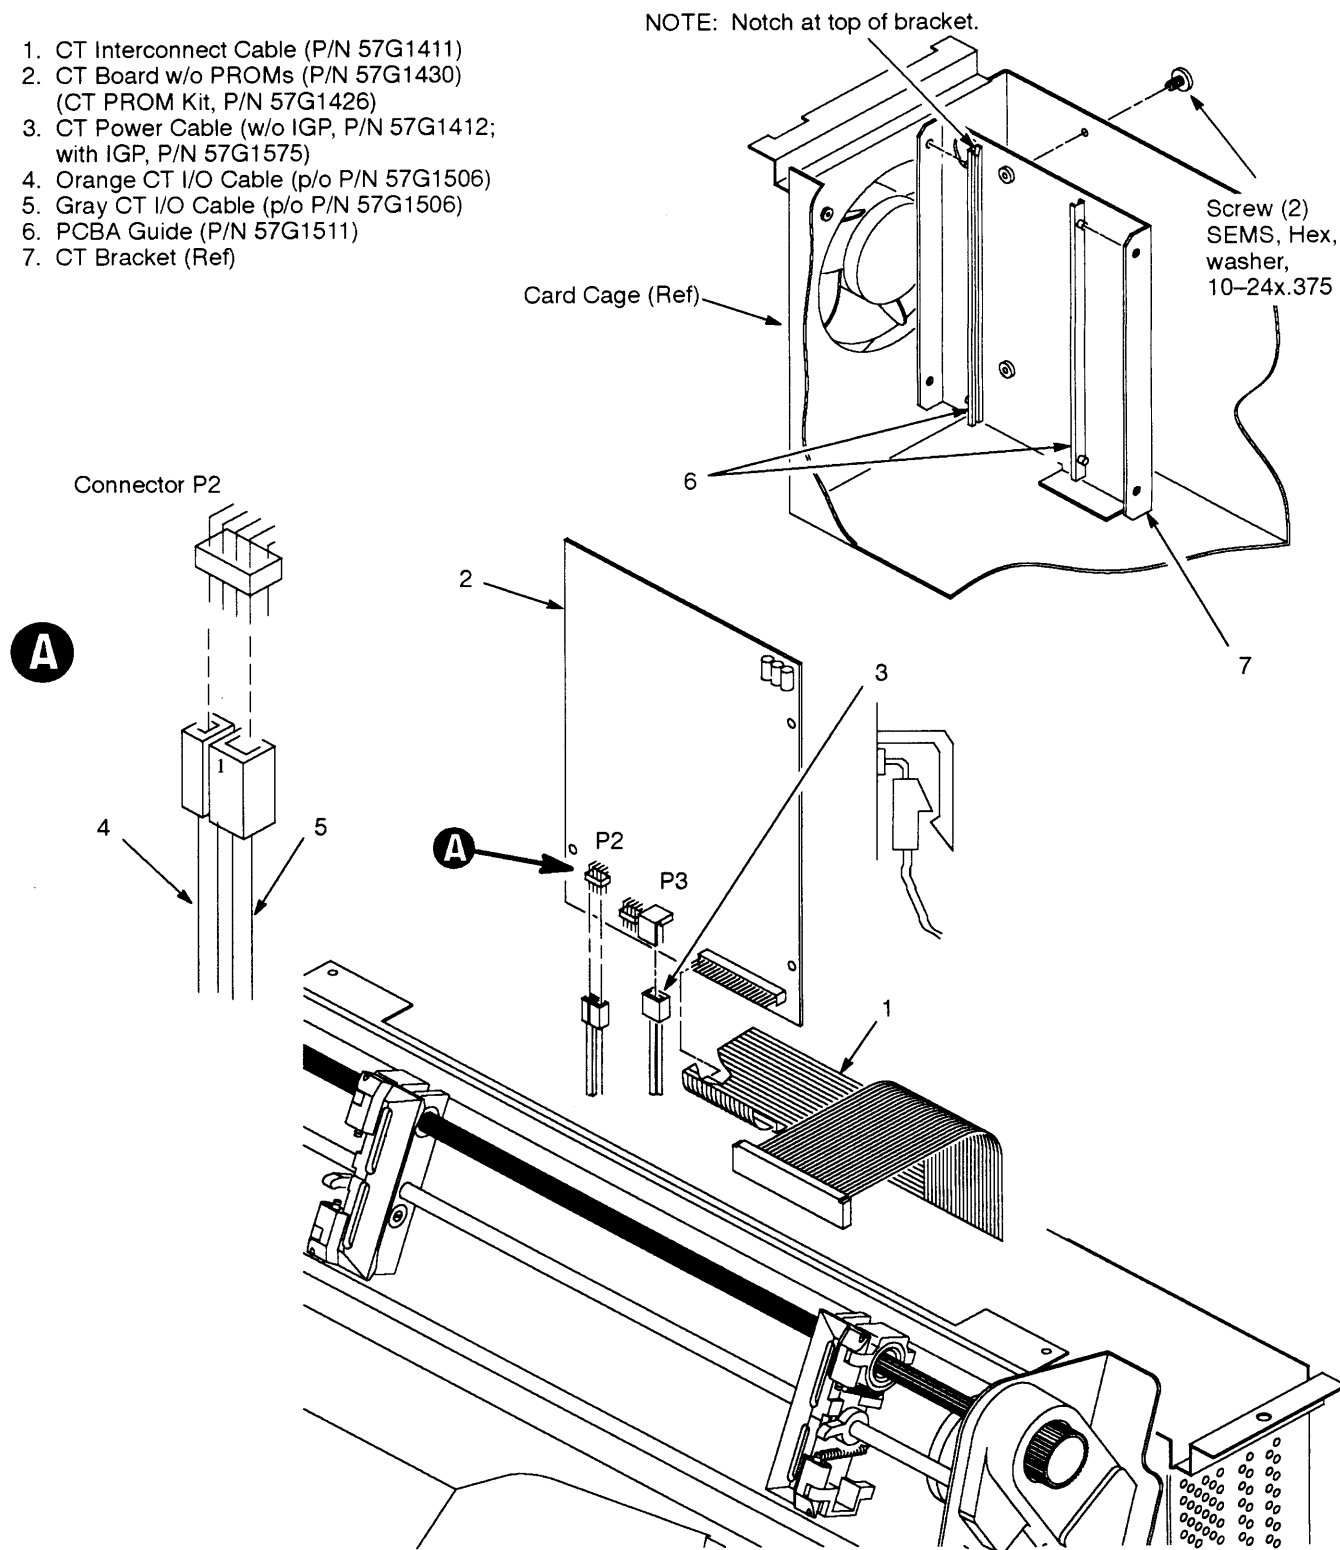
Coax/Twinax Integrated Interface (CT), Removal/Installation
